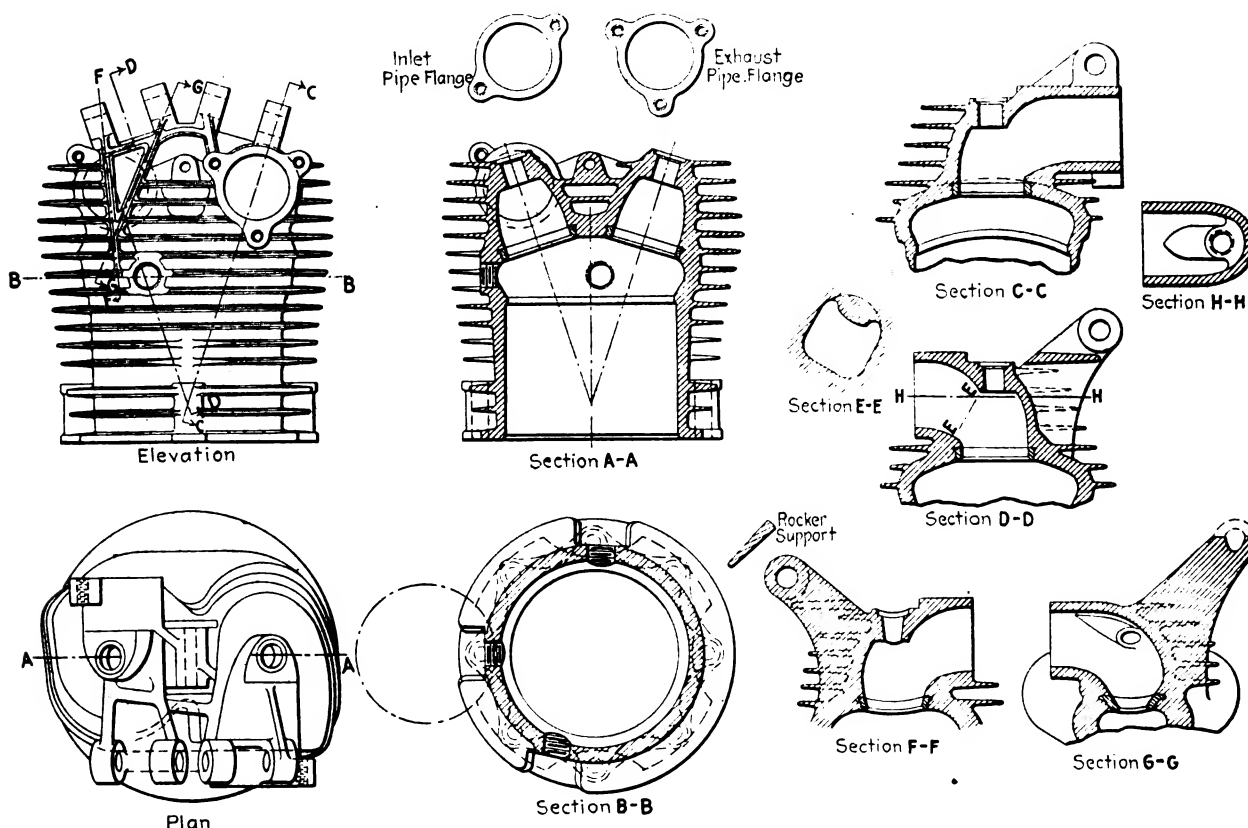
THE ROYAL AIRCRAFT FACTORY AIR-COOLED ALUMINUM CYLINDER WITH FLANGE AND BOLT CONSTRUCTION
